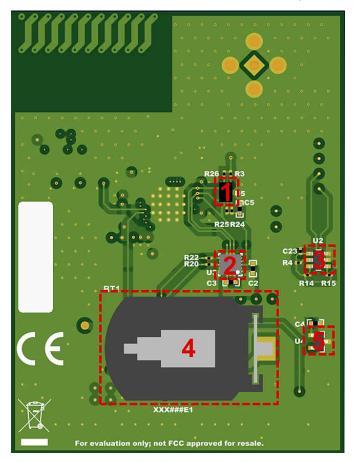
Door and Window Sensor Evaluation Platform Bottom View
